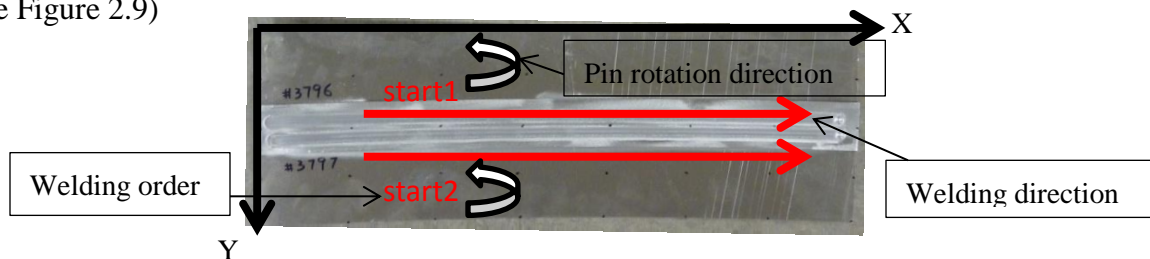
Picture of same welding direction with RH thread pin tool
